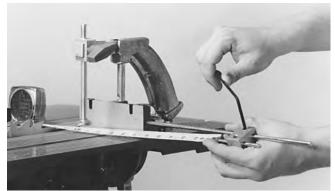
To adjust the miter gauge stop rod for length of cut, measure between the rod and blade. If the blade has set teeth, measure from the tip of a tooth that points toward the rod.
